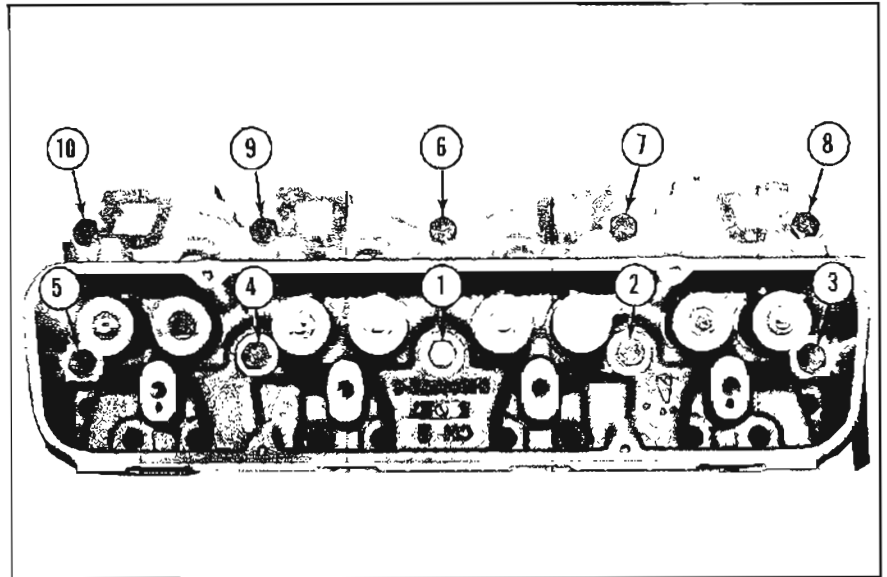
Cylinder Head Bolt Tightening Sequence
